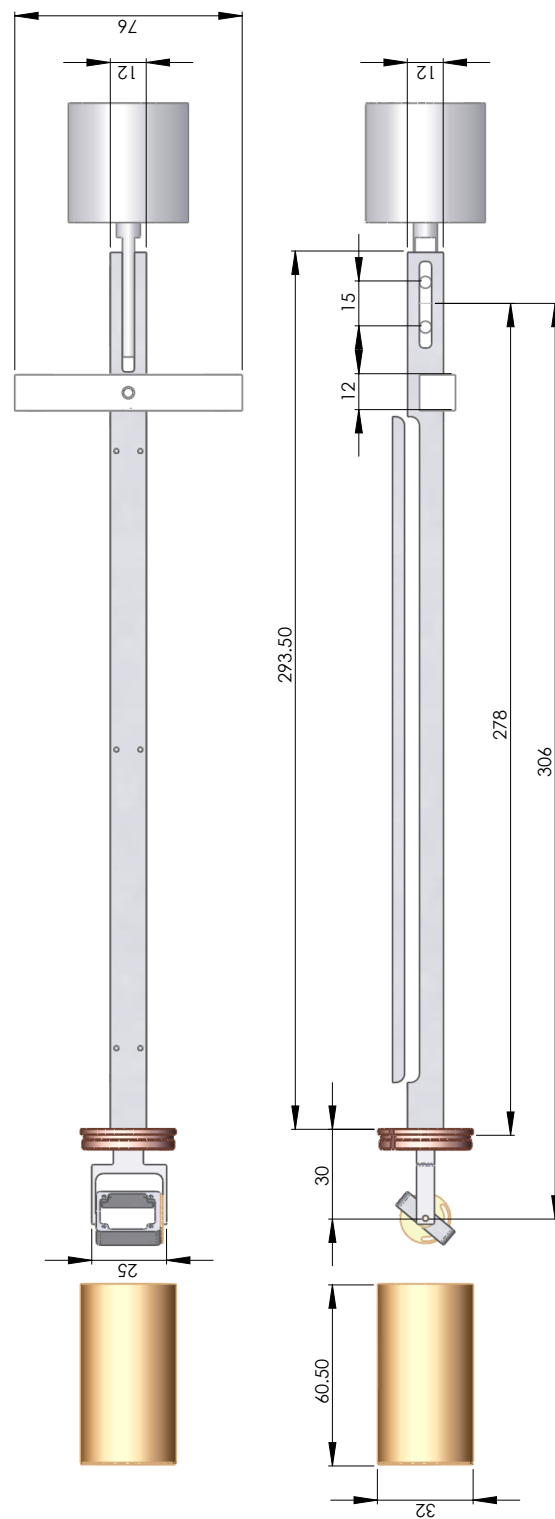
Technical drawing showing the dimensions of the conventional coldfinger
